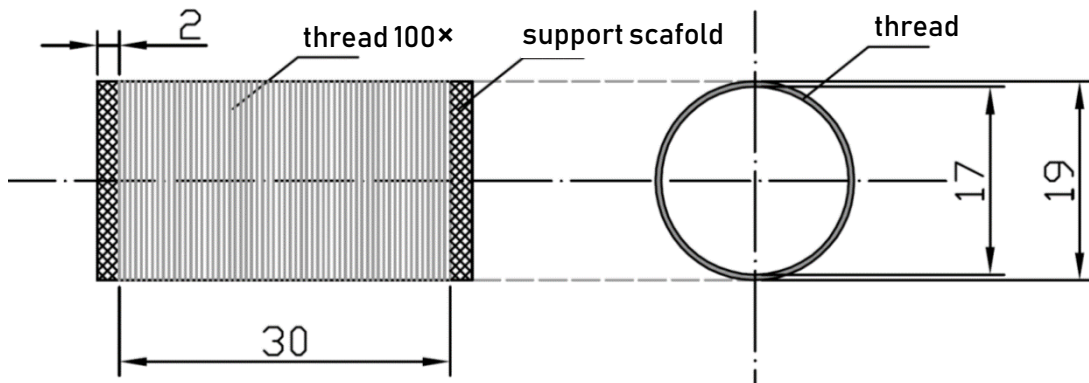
Technical drawing of the cylindrical arrangement. Dimensions in mm.
